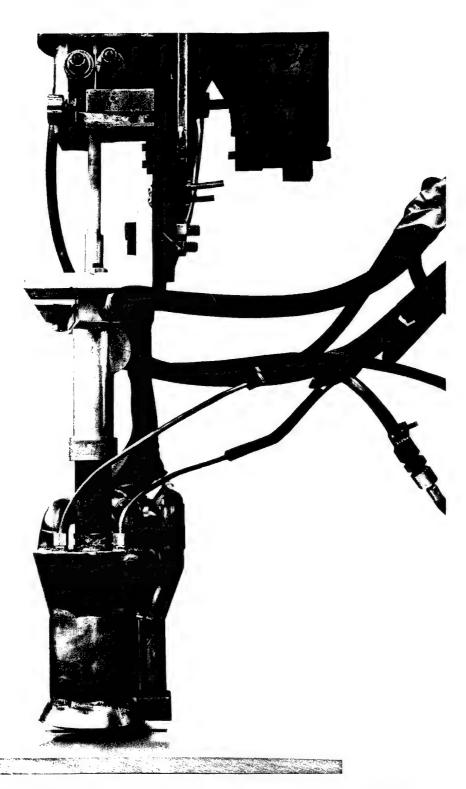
Side view showing special welding nozzle mounted on machine barrel welding gun.
